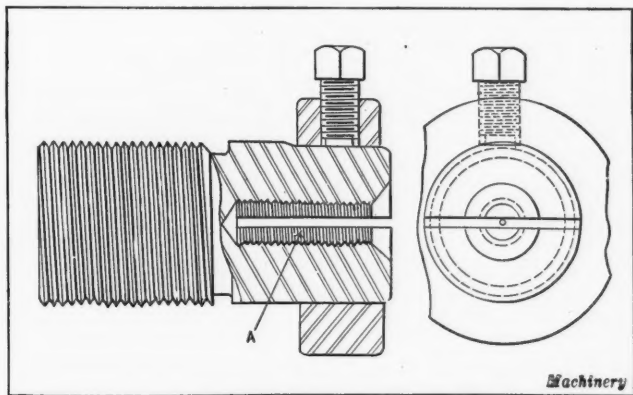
Pull-bushing intended for Broach with Threaded Shank
